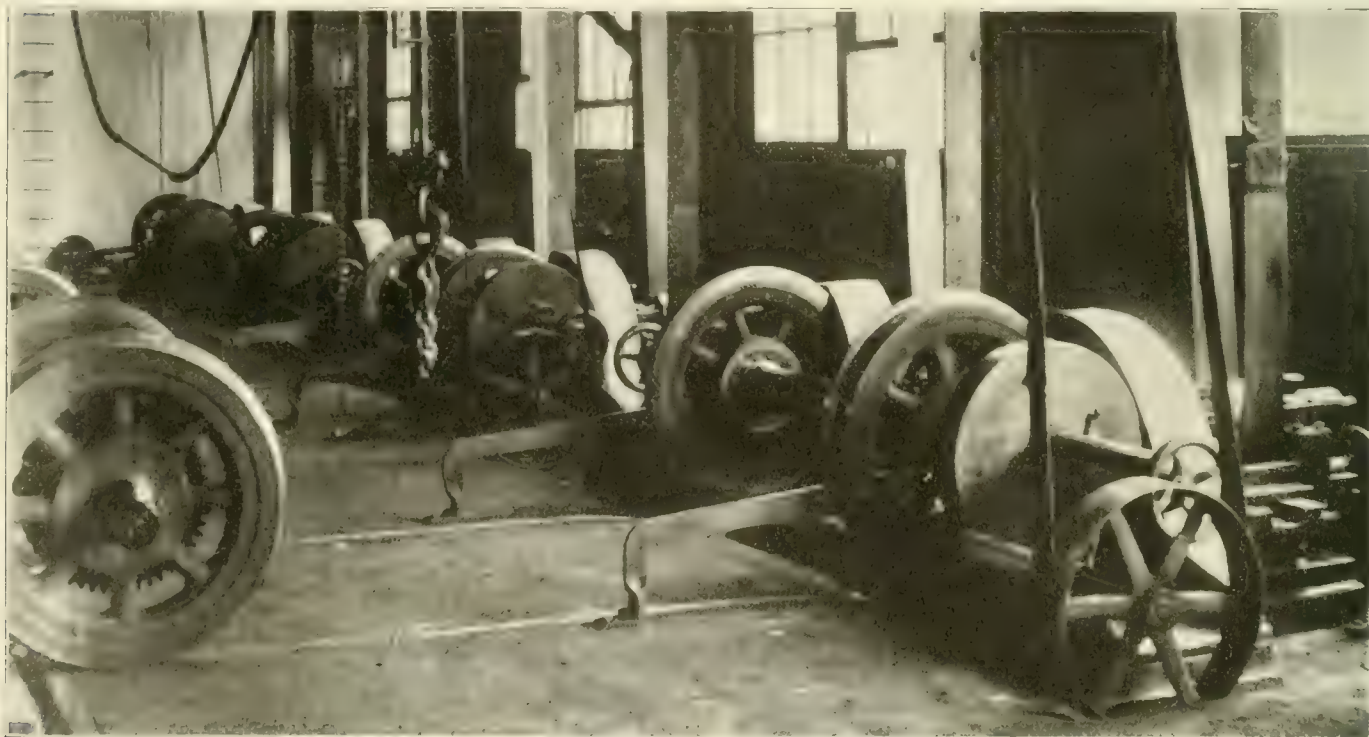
SPRINGFIELD WHEEL GRINDING MACHINES, BOSTON ELEVATED RY.
